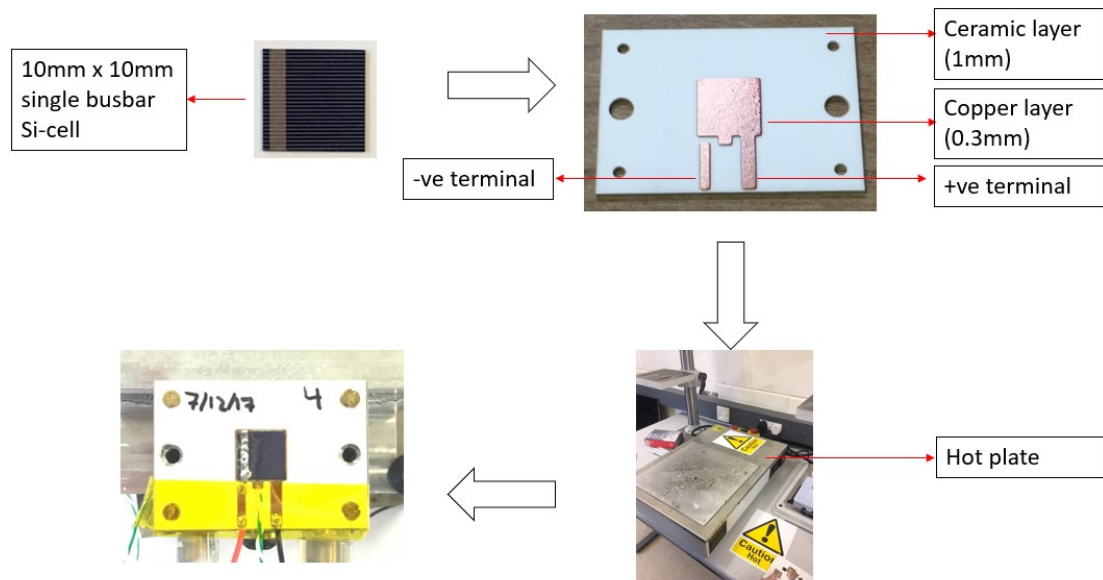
Drawing showing the solar cell soldering process in the DCB board.
